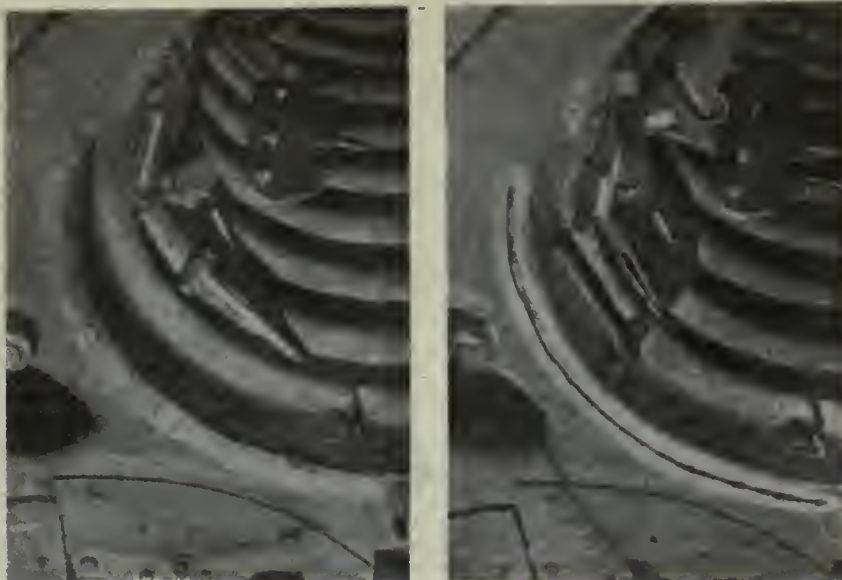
(TOP) BEFORE WELDING. FIG. 2—(BOTTOM) AFTER WELDING.
